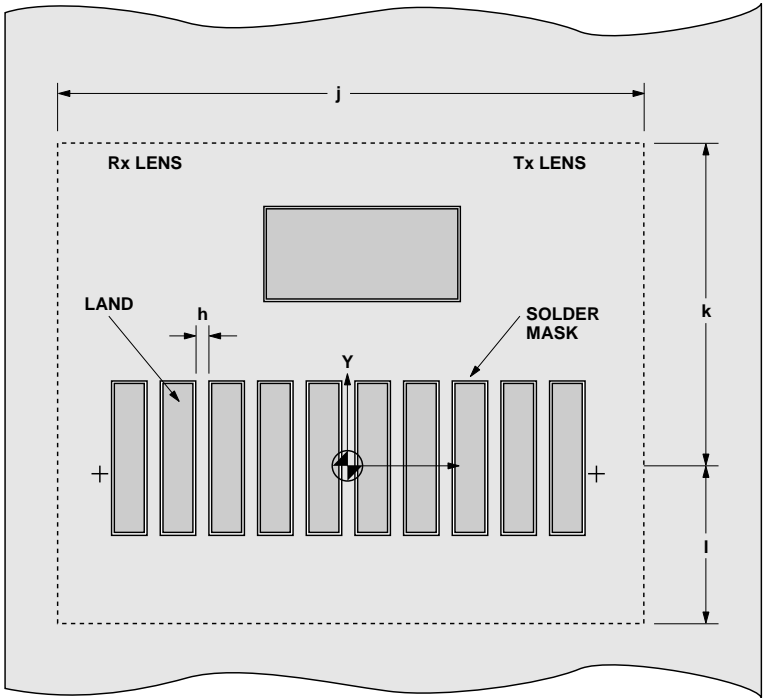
HSDL-3610#008/#018 PCBA – Adjacent Land Keep-out and Solder Mask.
